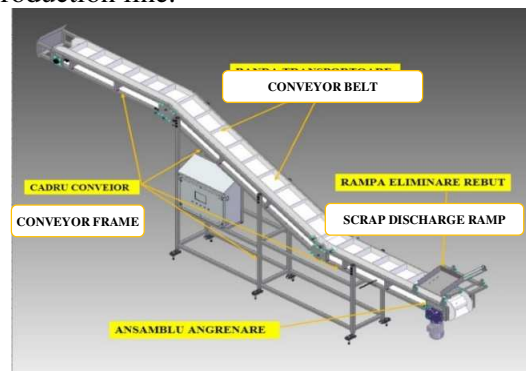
DRIVE ASSEMBLY CONVEYOR for product in the Design Phase (3D Model)
